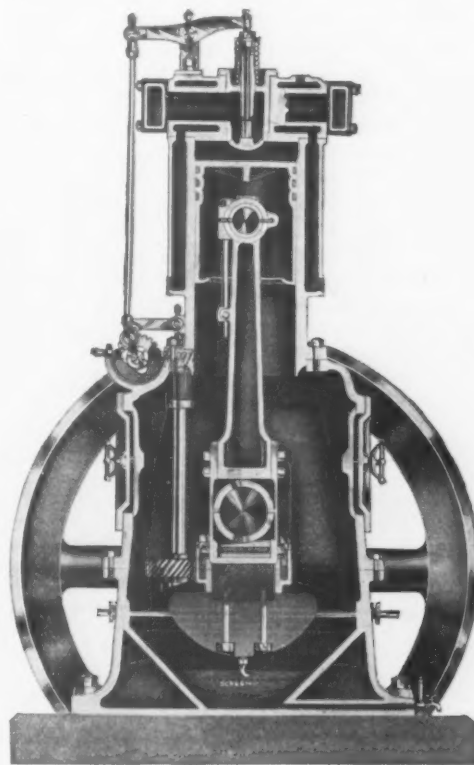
Cross Sectional Elevation through One Cylinder of the Lazier Gas Engine.
